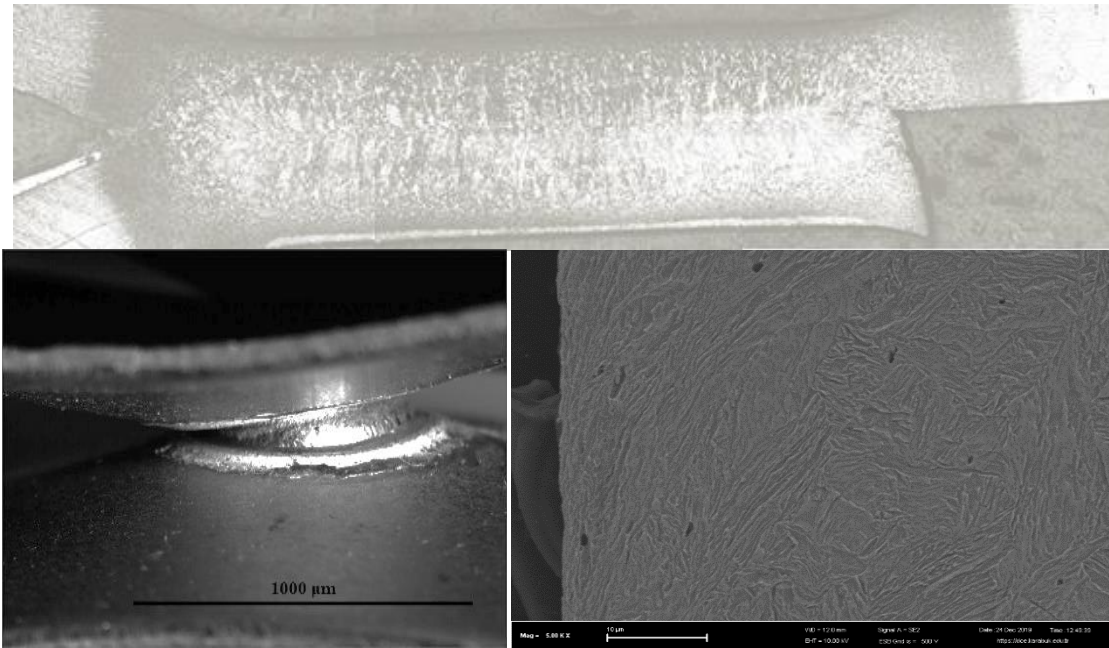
Failure mode pull out in resistance spot welding for HAZ.
